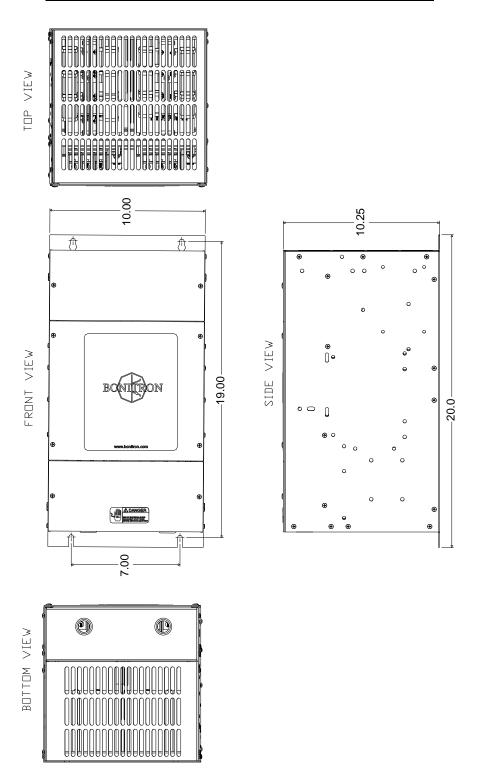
Dimensional Outline for the 150A M3500DB4
